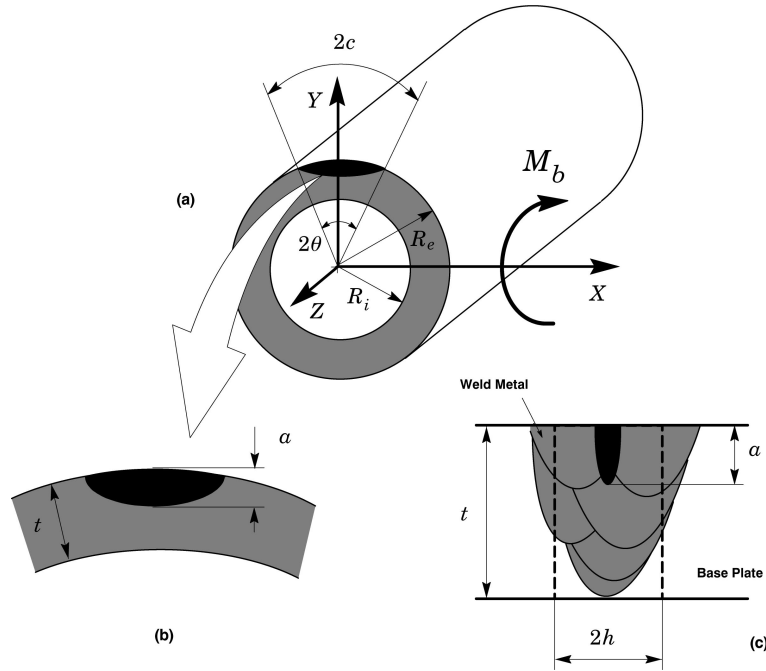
Circumferentially cracked pipe under bending and weld centerline defect geometry
